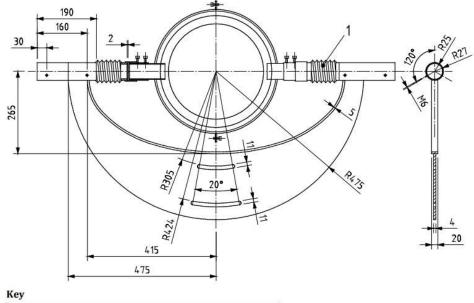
Measuring tube - Gas sampling probe and thermocouples
